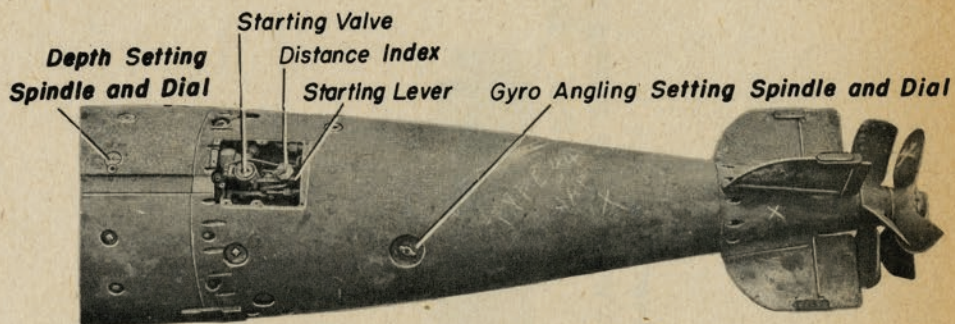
Torpedo Type 44 Mark 2 Mod 1, Afterbody, Top View
